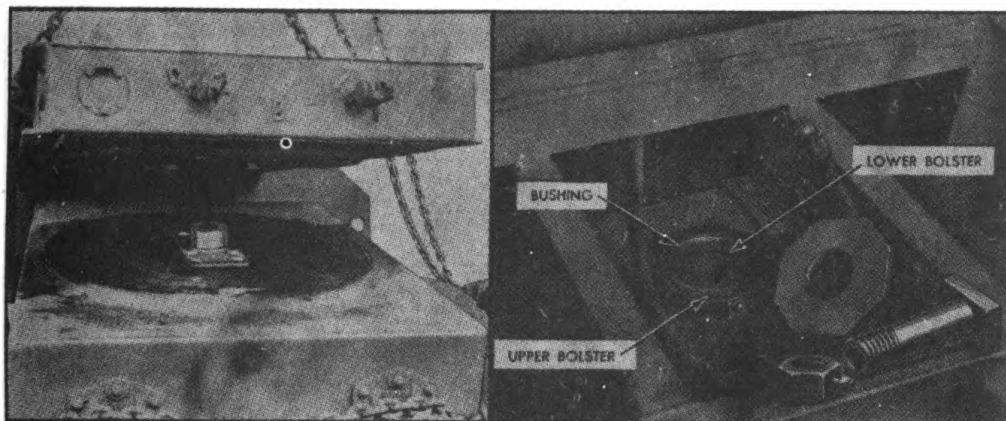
TRAILER AND GEAR DISASSEMBLED
